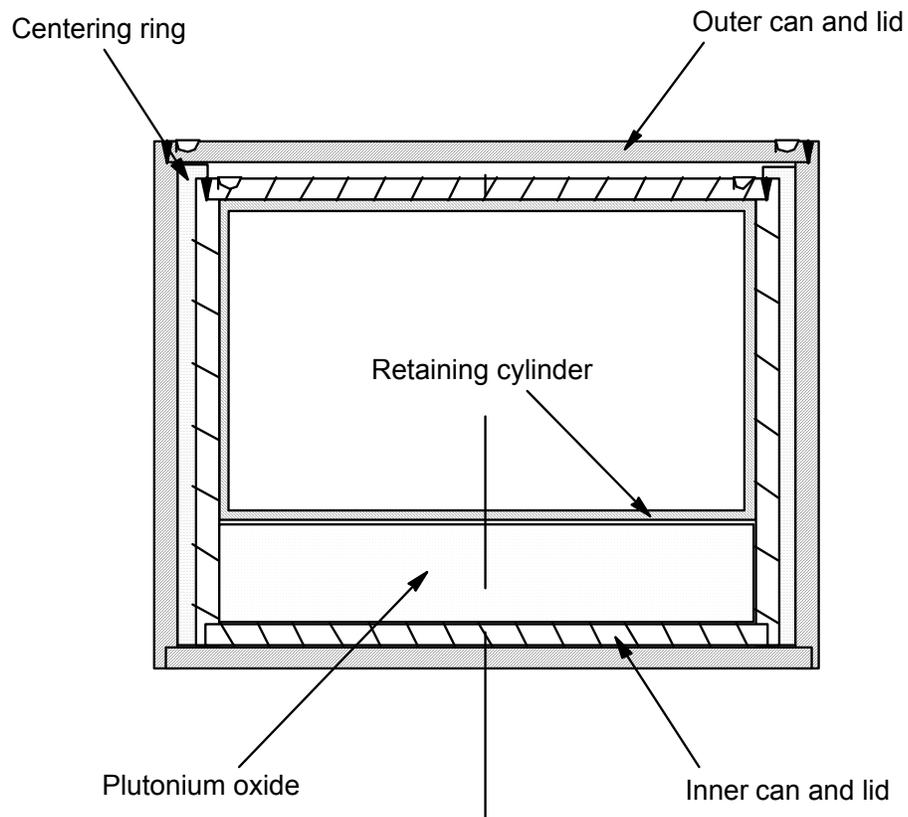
Drawing of the stainless steel container for the oxide standards. Three different retaining- cylinder heights accommodate the thickness of the three nominal PuO_2 masses (Table III). Welds are indicated for inner and outer cans.
